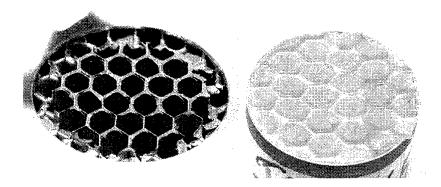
Failure surfaces resulting from tensile testing of the Untreated honeycomb and AF131-2 adhesive conditioned 30 days at 70°C/100%R.H., indicating fillet bond pull-out and cohesion failure.
